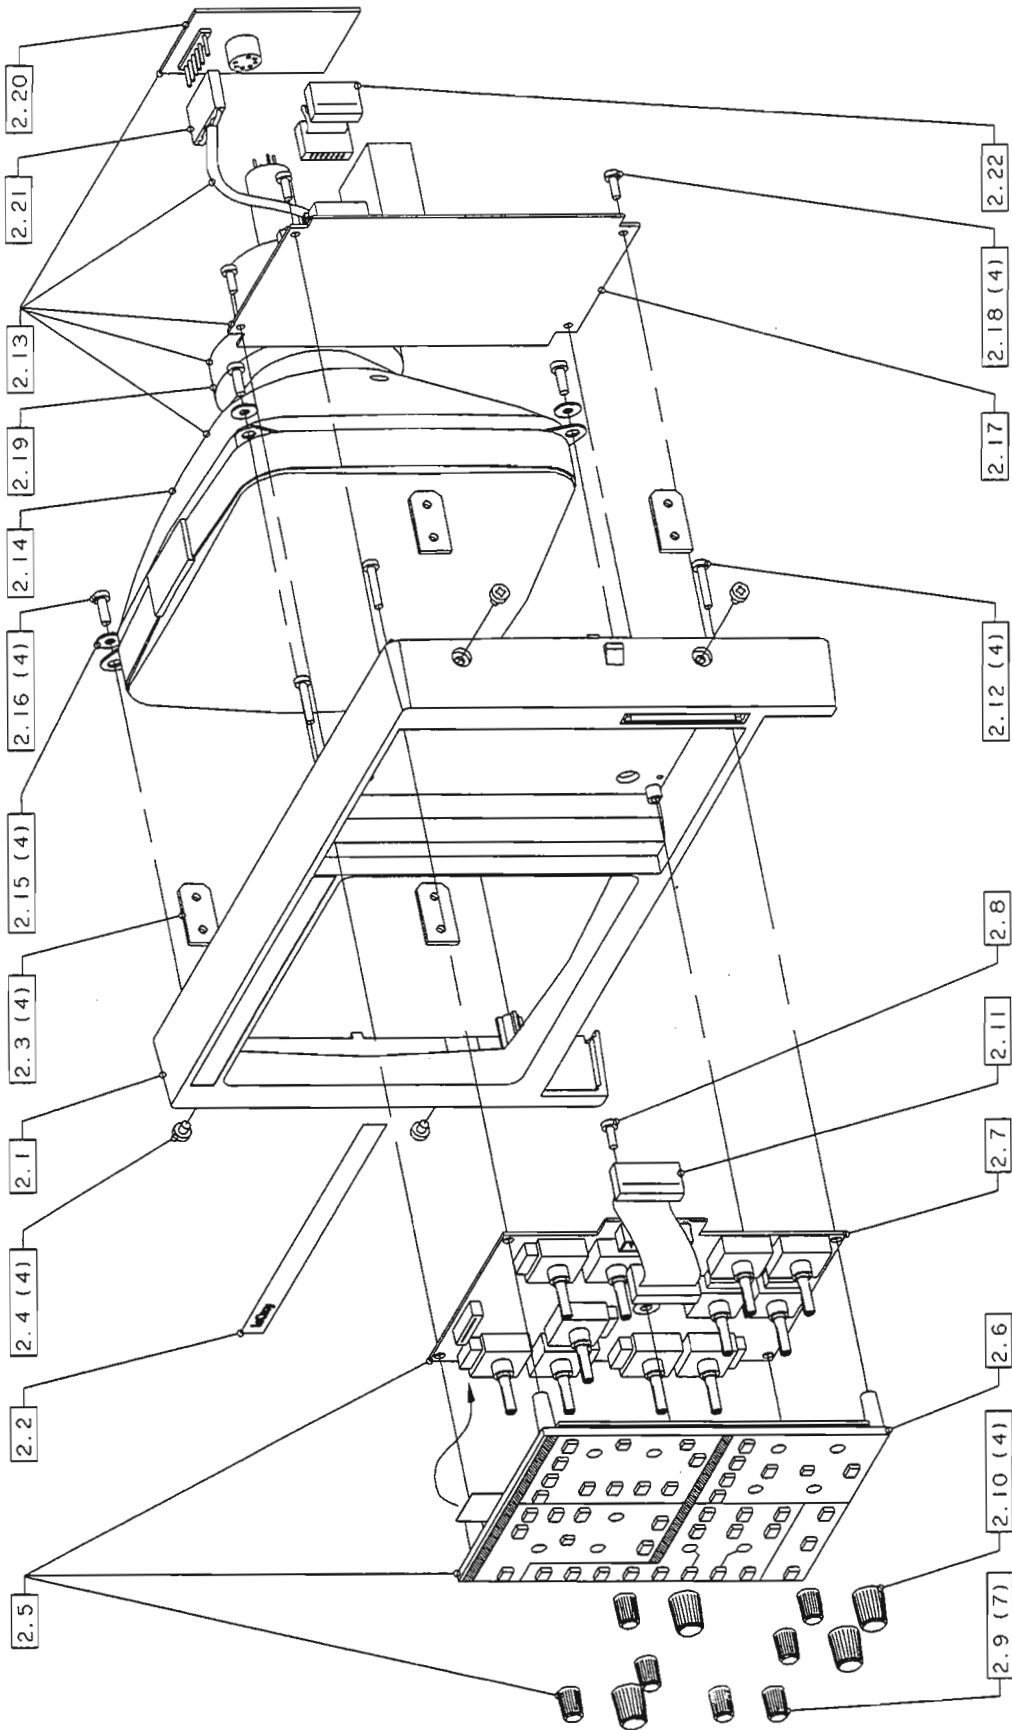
9374/M/L/TM Front Frame Exploded View
